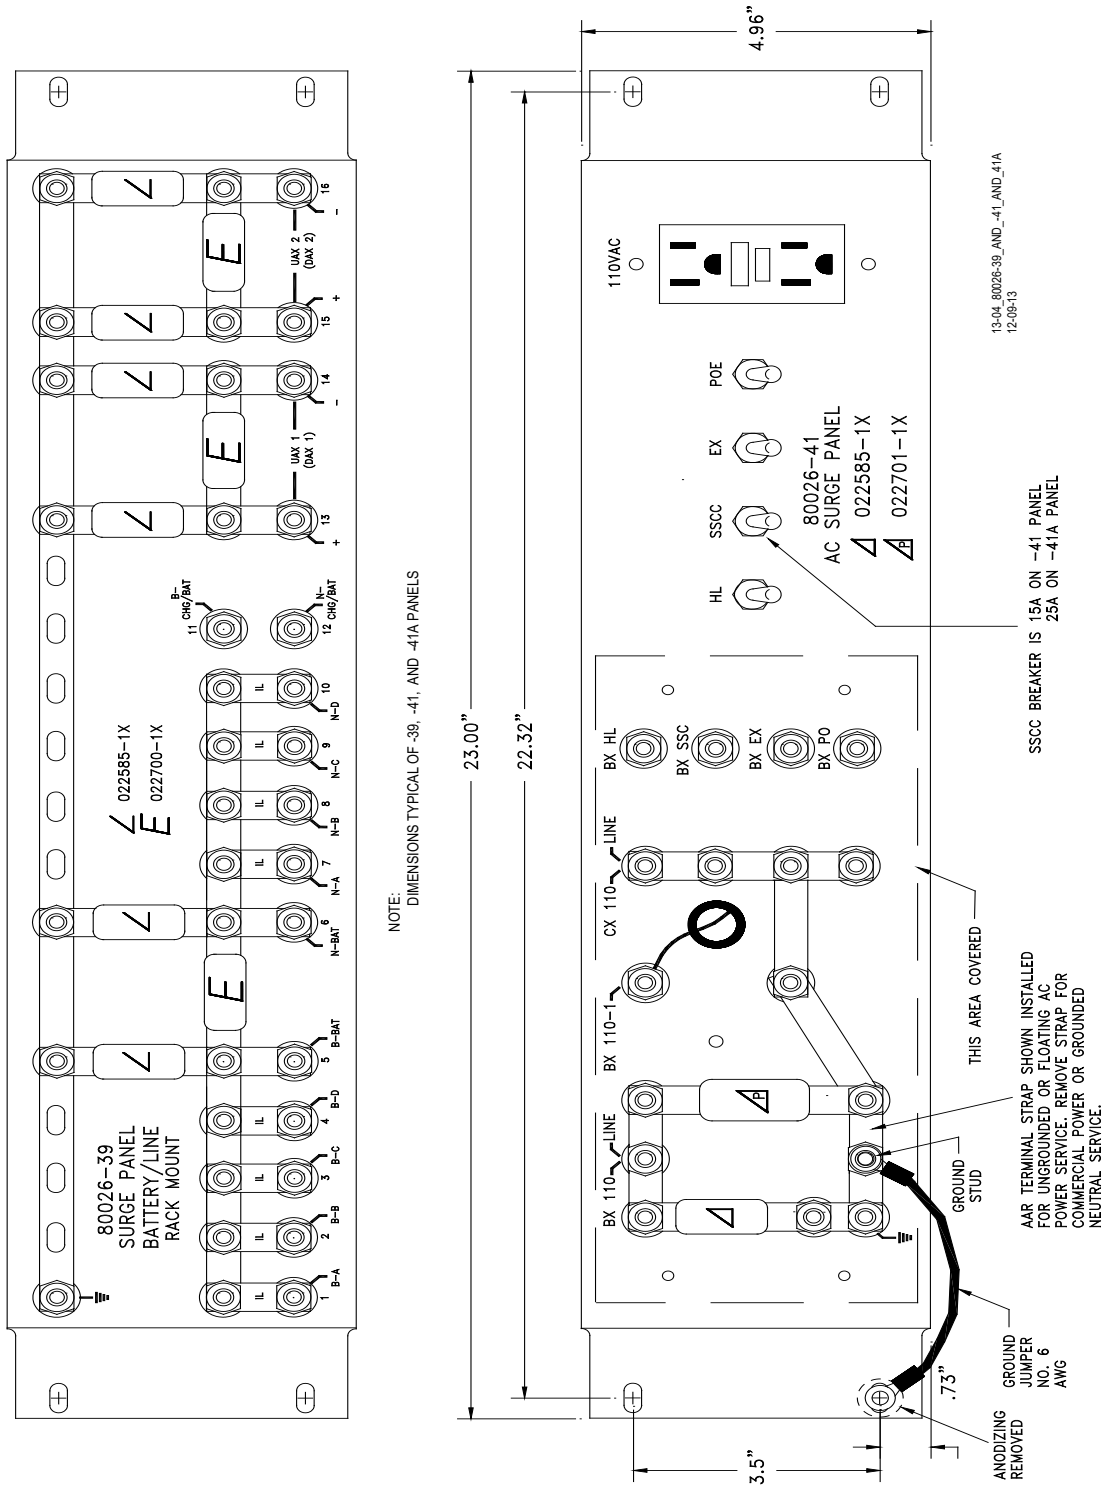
Rack Mounted Surge Panels. 80026-39, -41 and -41A
